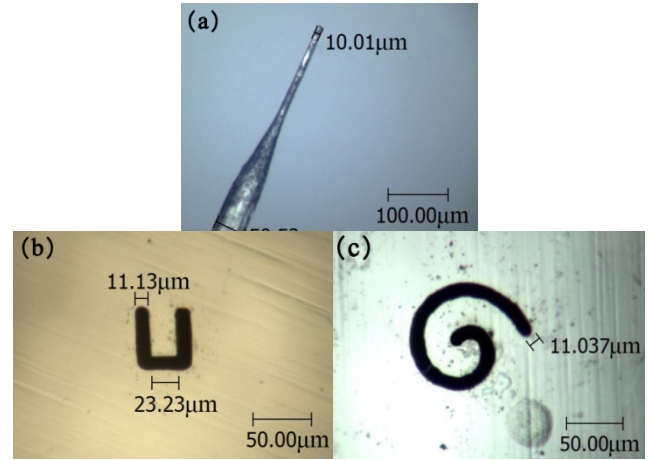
Machined micro-structures. a) tool electrode; b) micro-beam machined; c) micro-curved beam.
